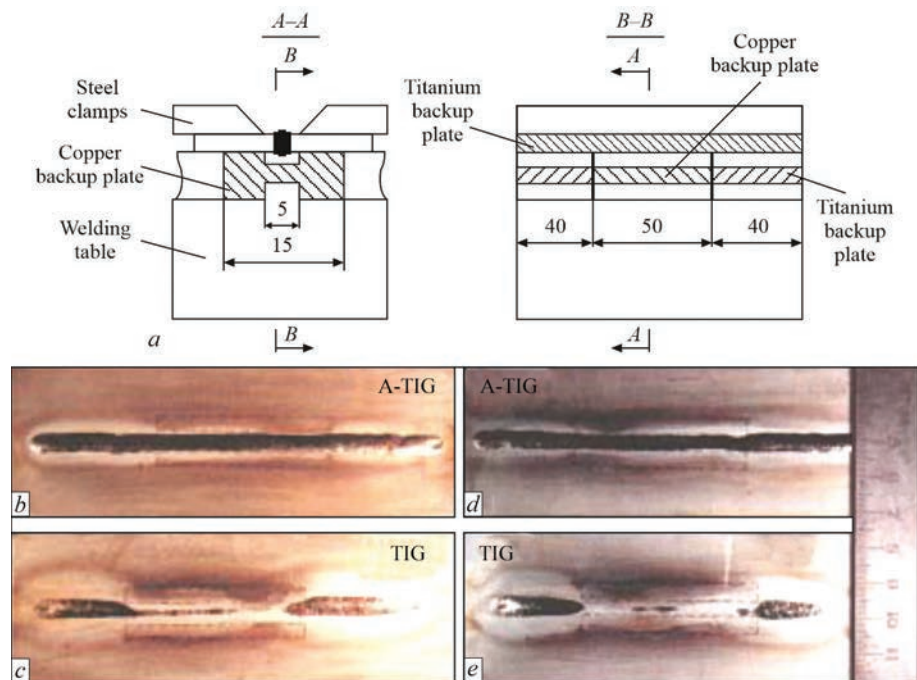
Scheme of assembly (a) and outer appearances of specimens after welding of VT-20 alloy of $\delta = 2$ mm thick at a full penetration on the side of the weld root with heat removal, which changes along the length of the specimen: A-TIG welding (b, d); TIG welding (c, e); with lower heat removal (b, c); with greater heat removal (d, e). The dotted line in Figure 5, b–e marks the location of copper backup plate
